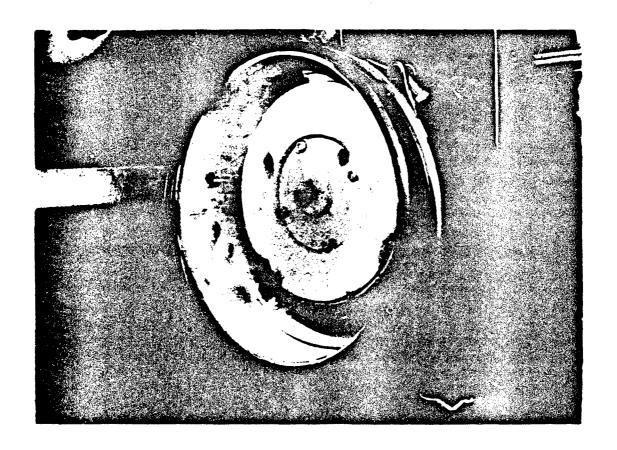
Barrier Filter Element Mounted Eccentrically in Housing
